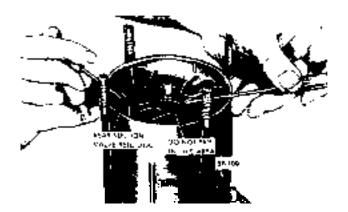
I 26 Removing Rear Suction Valve Reed Disc
